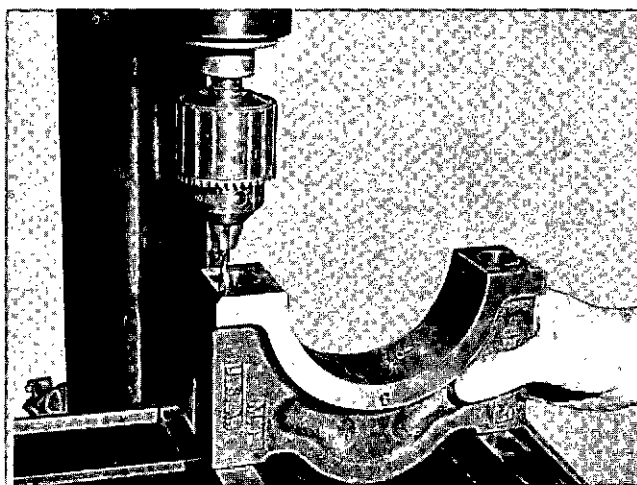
, V40129. Drilling dowel hole in rear main bearing cap
